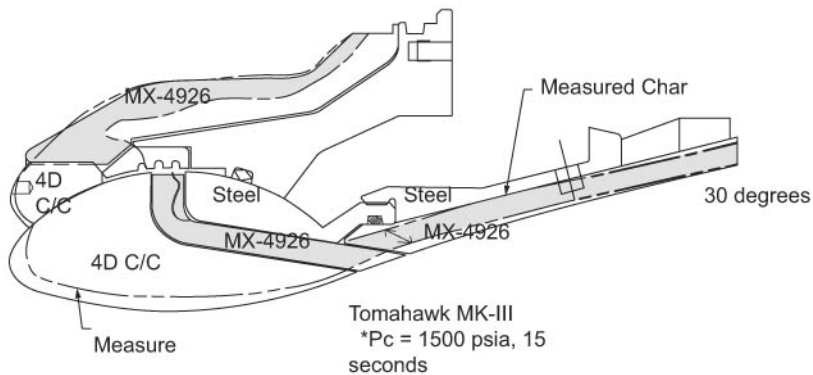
Schematic of a typical solid rocket motor assembly showing the usage of MX-4926.
